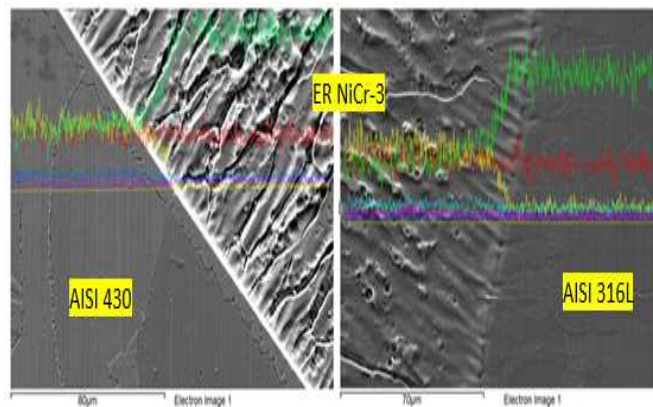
SEM Line Spotting EDS Analysis on Dissimilar Weldments Employed by ER NiCr-3 Filler PCGTA Weldments
